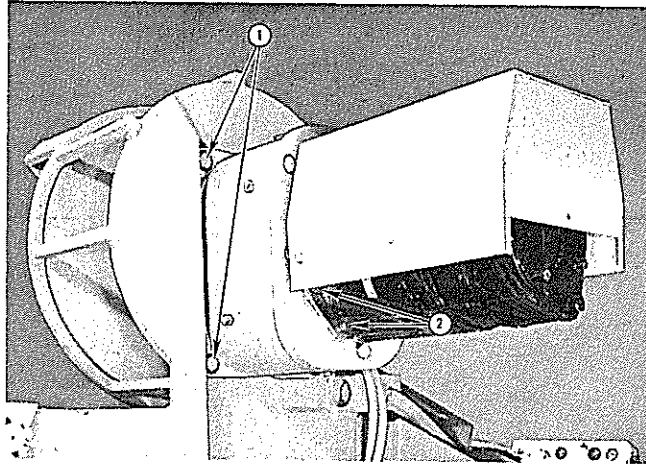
WINCH MOTOR AND GEAR BOX
